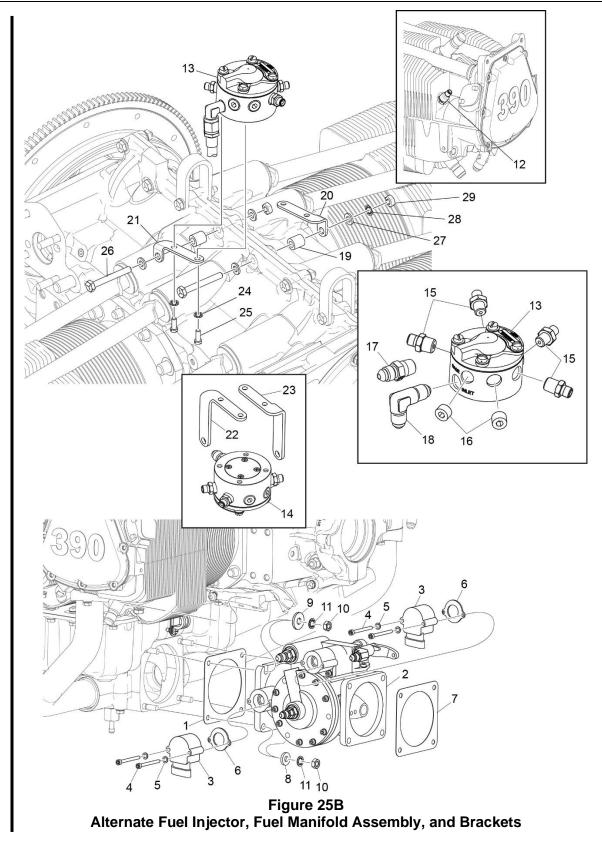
B - Alternate Fuel Injector, Fuel Manifold Assembly, and Brackets
